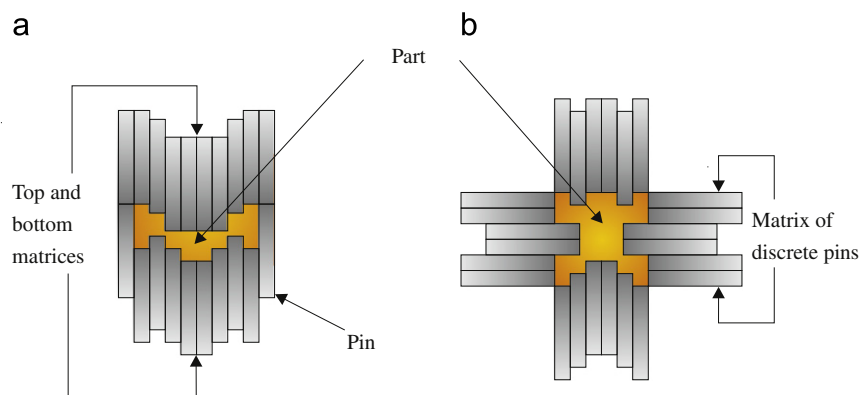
Cross-sectional view of the closed reconfigurable mold tool: (a) 2-matrix setup and (b) 6-matrix setup.
